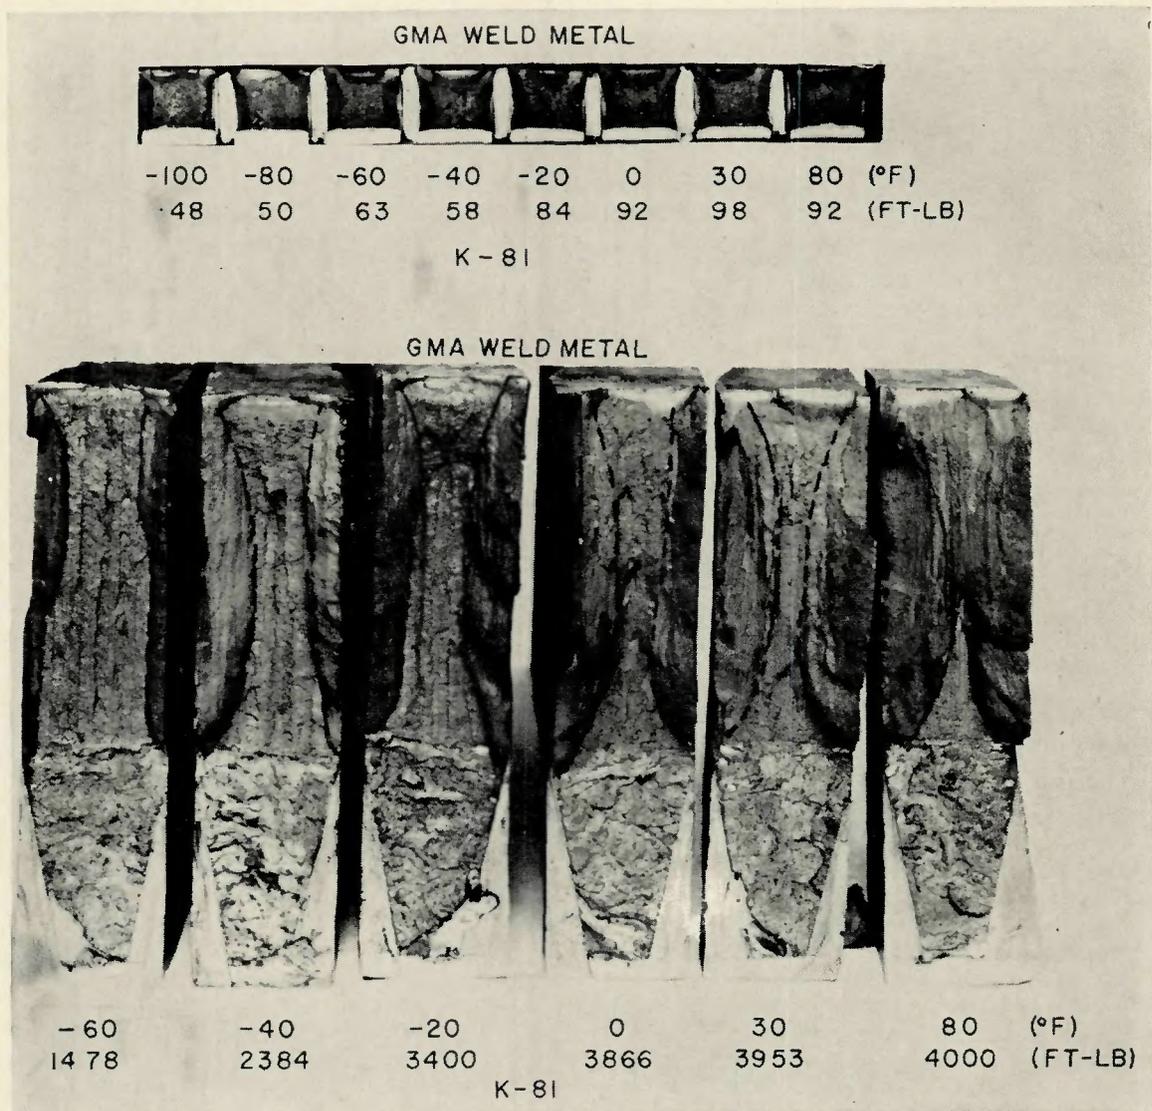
Illustration of the lack of fracture mode transition of Charpy V-notch specimens (top) and the dramatic change shown by the Dynamic Tear specimens (bottom) for gas metal-arc weldment K-81
